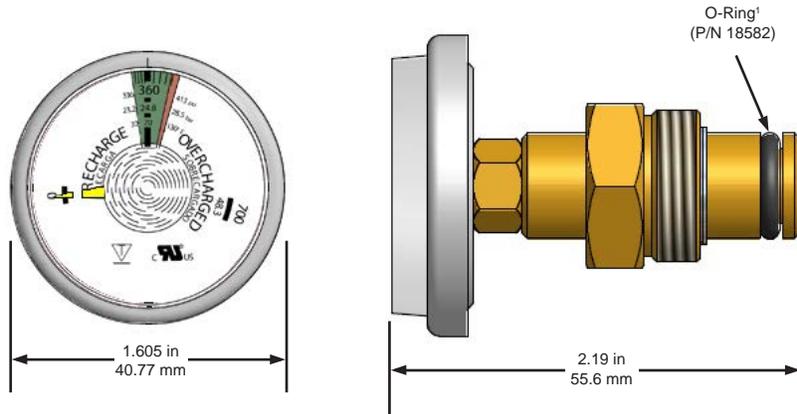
Mv and Lv Series Pressure Gauge Assembly
